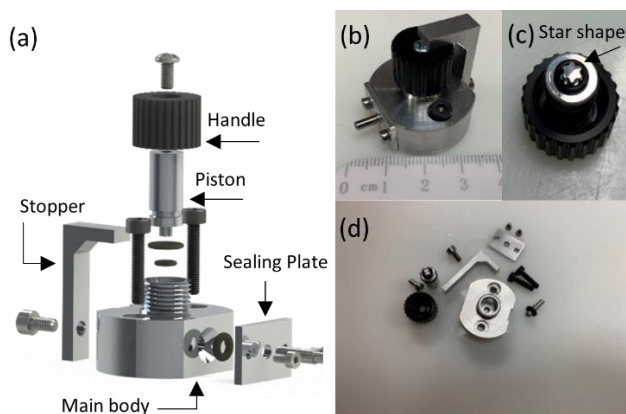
(a) An exploded 3D-CAD view of the high-vacuum valve with
